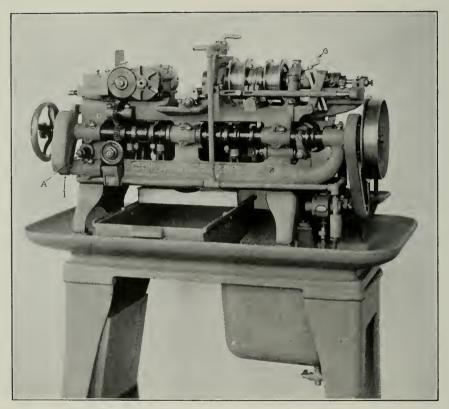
Brown & Sharpe Automatic Screw Machine (Rear View)
